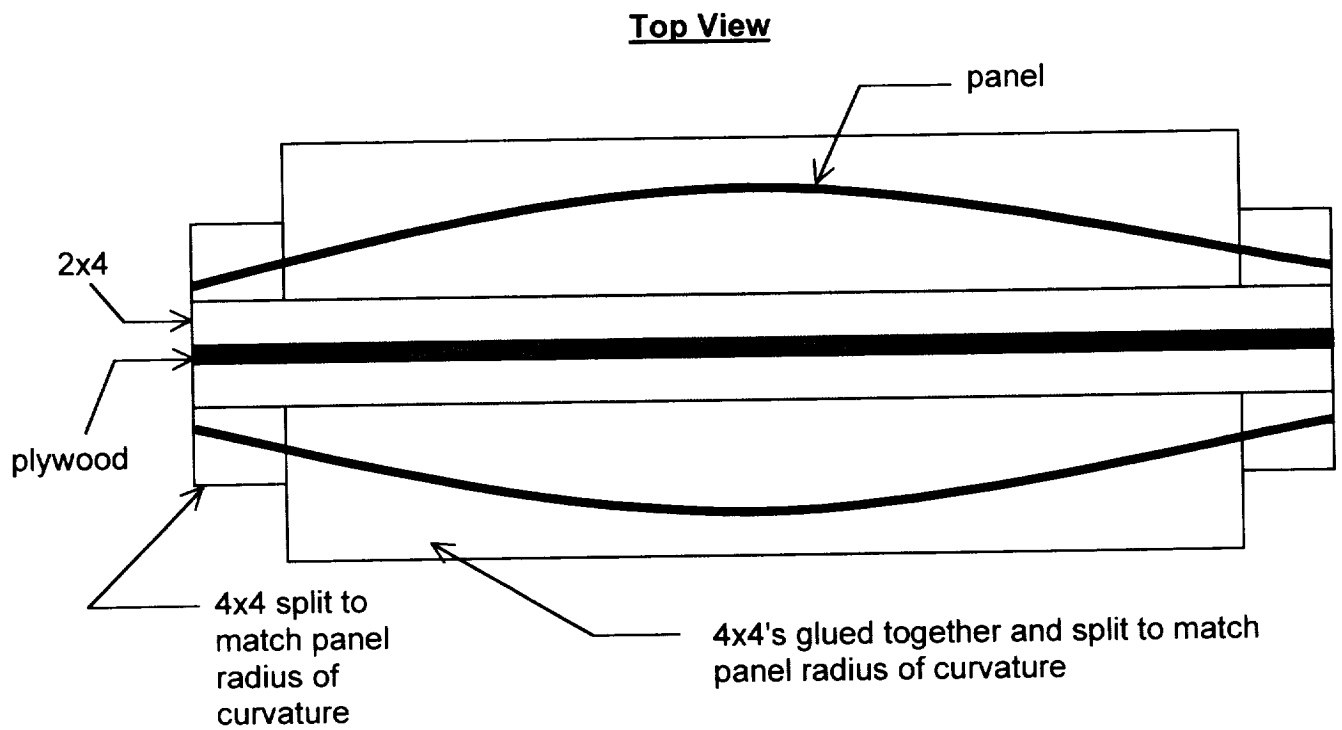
Schematic diagram of clamping arrangement used to fasten fuselage panels to pressurization test fixture. (Drawing is not to scale.)
